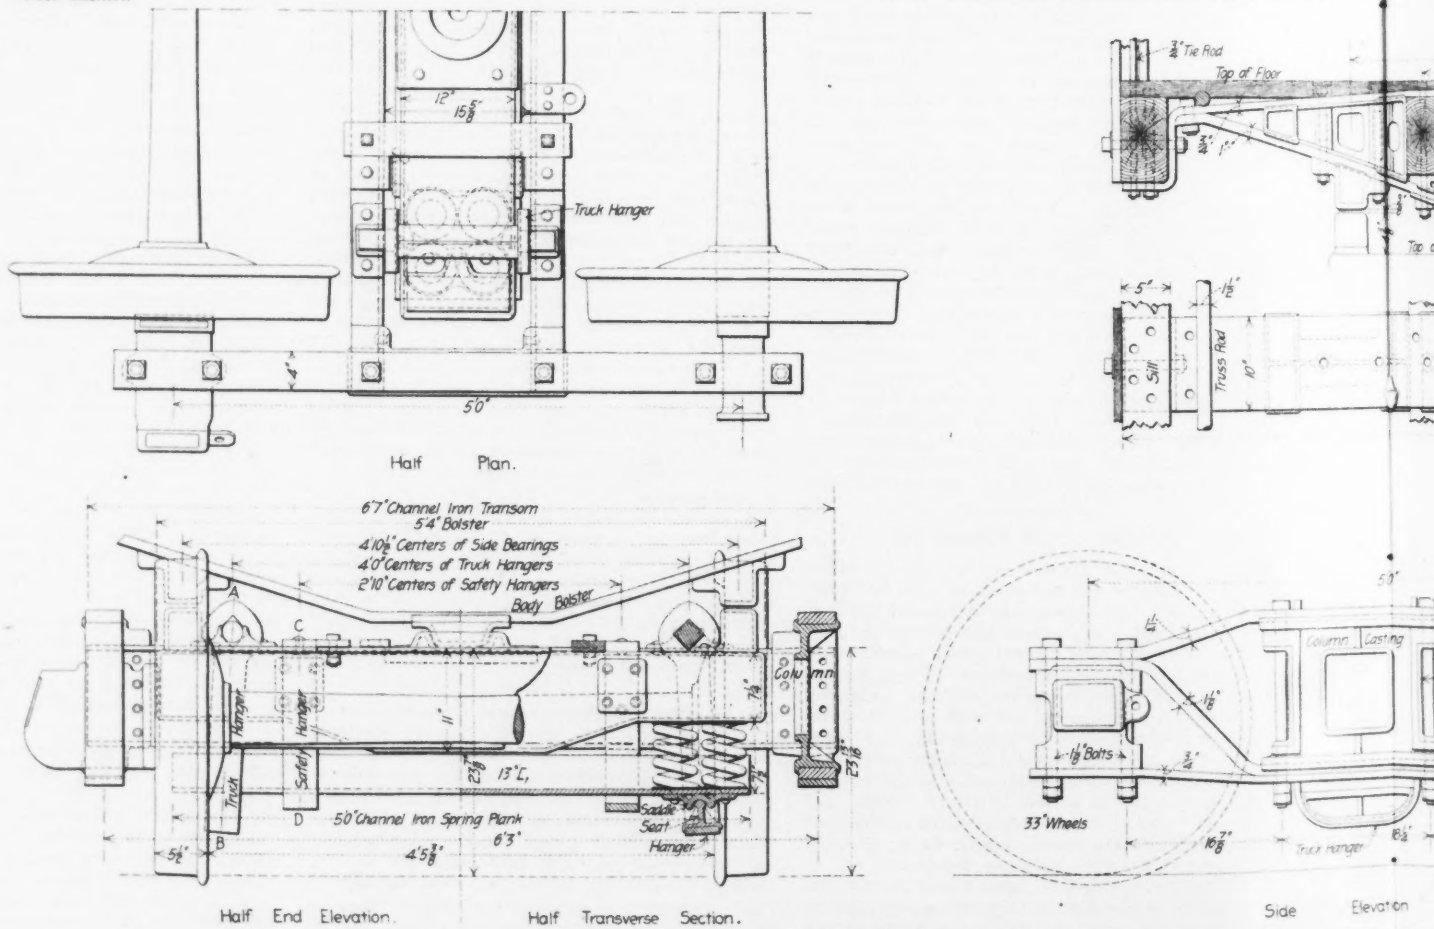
ELEVATION, SECTIONS AND PLAN OF CAR.
